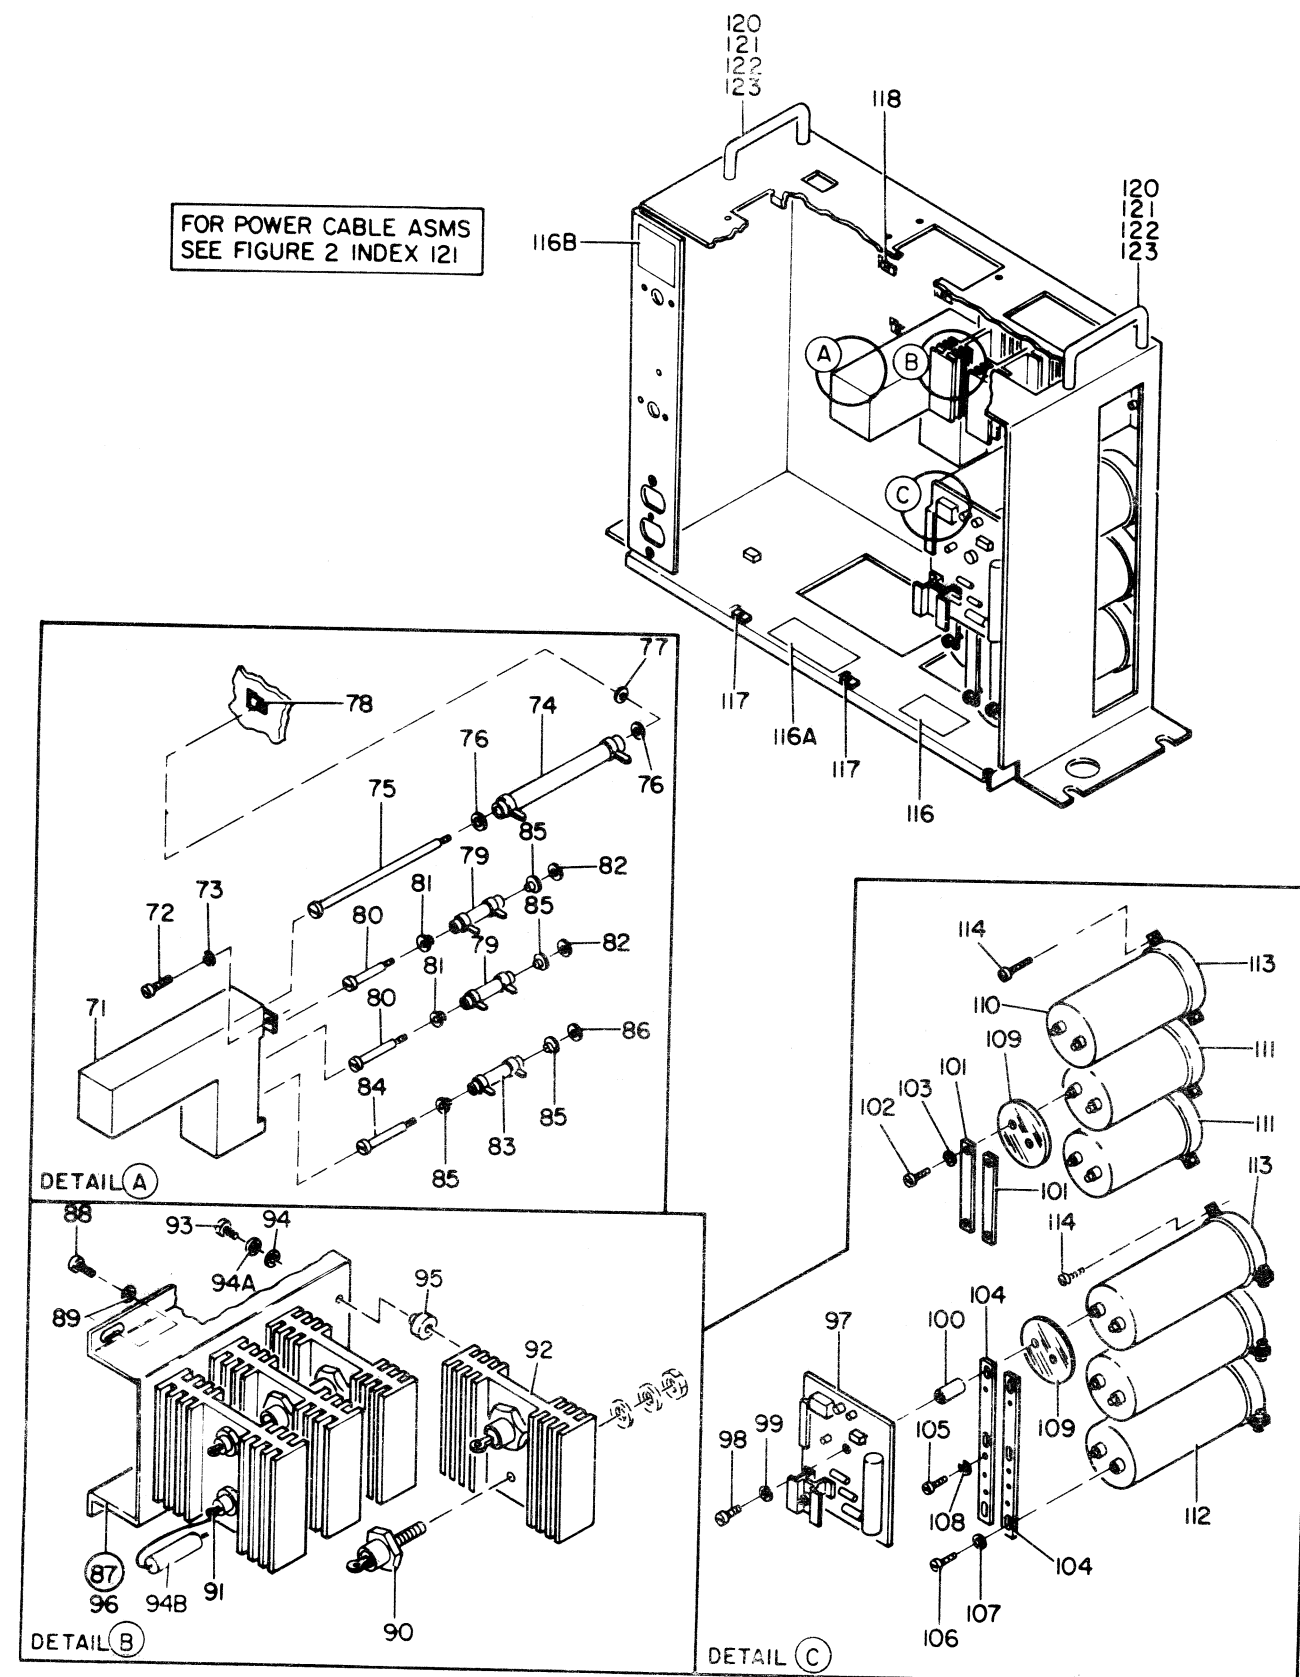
300/650 LPM 50/60HZ POWER SUPPLY ASSEMBLY. SHEET 3 OF 4. INDEX NOS. 71-123. SEE LIST 17.
